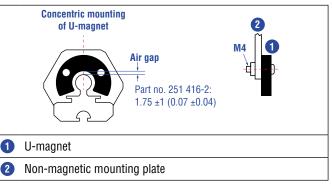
Mounting of U-magnet (part no. 251 416-2)
